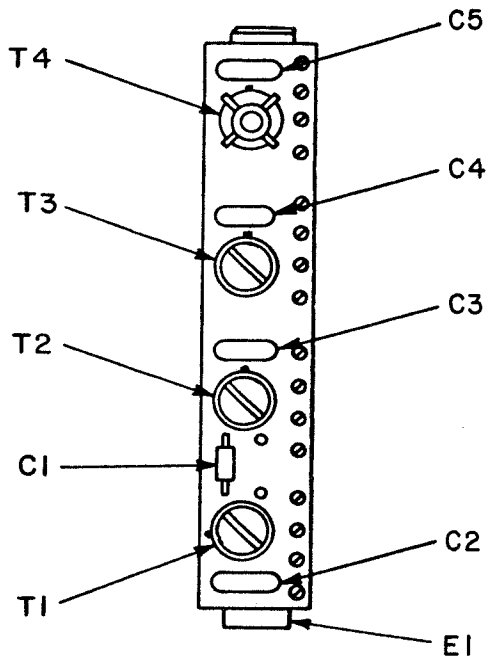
21 MHz Subassembly A2A4A11, Component Locations
